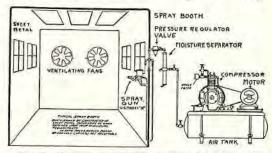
Example of equipment necessary for lacquer spray work. The spray booth should be constructed of sheet metal. In some cases beaver board or canvas curtains are acceptable. (From catalogue of U.S. Air Compressor Co., Cleveland, Ohio.)
